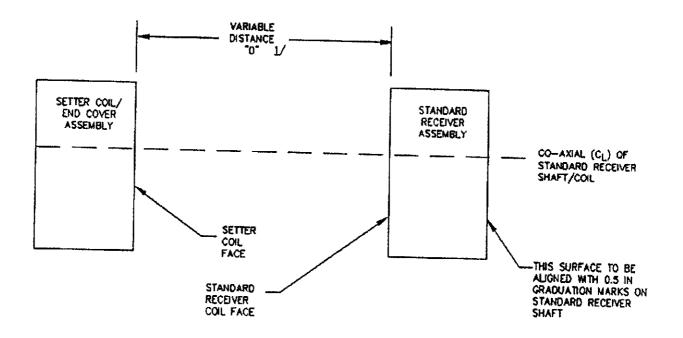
Standard receiver assembly on setter coil/end cover assembly.
